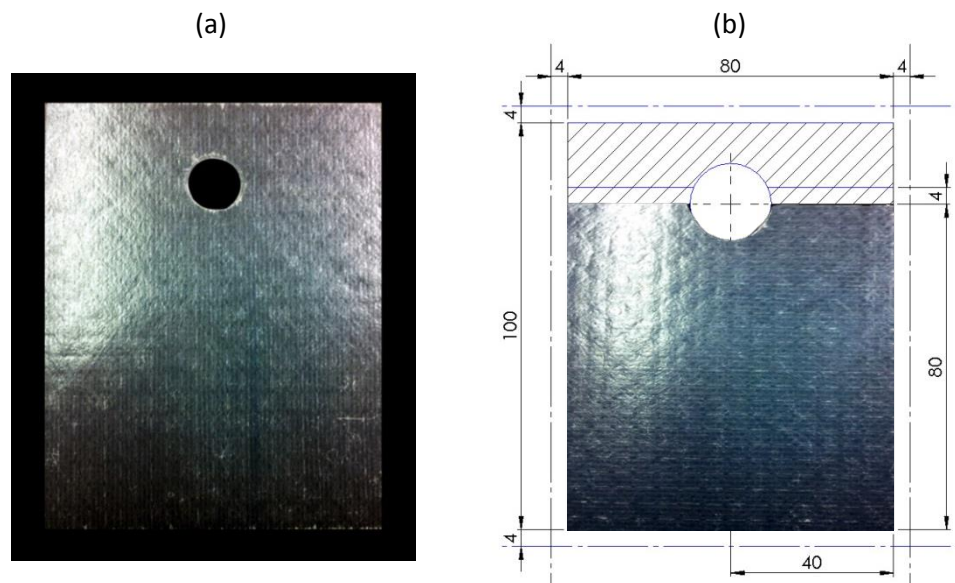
Pin-bearing Specimen Preparation (a) Uncut Drilled Specimen and (b) Finished Specimen and Dimensions
